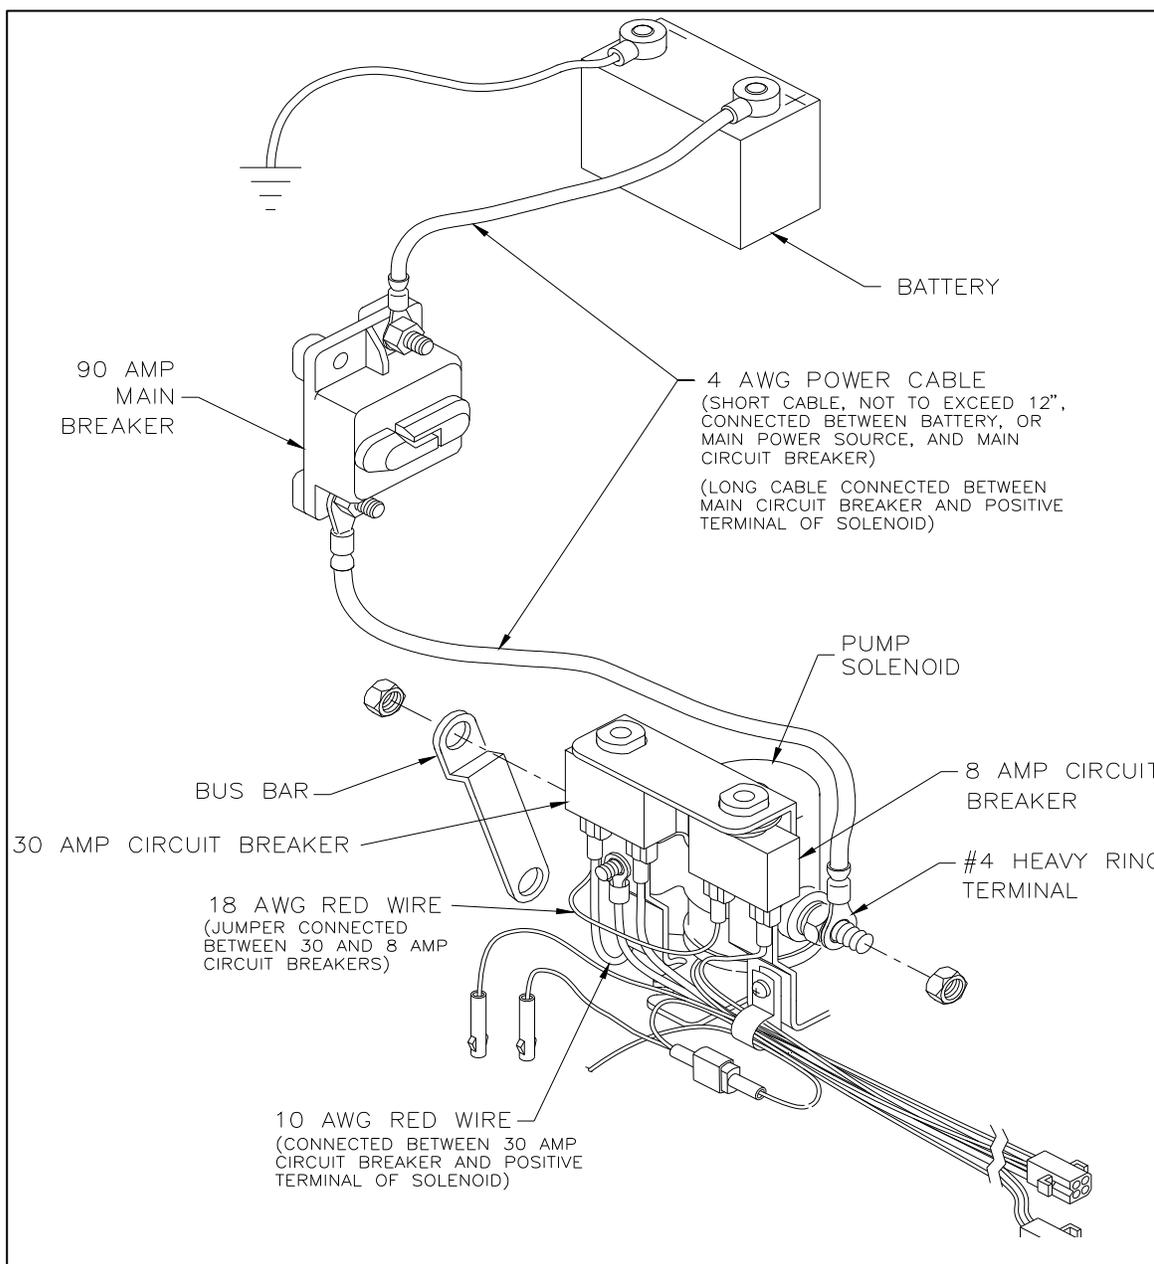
ELECTRICAL INSTALLATION DIAGRAM
